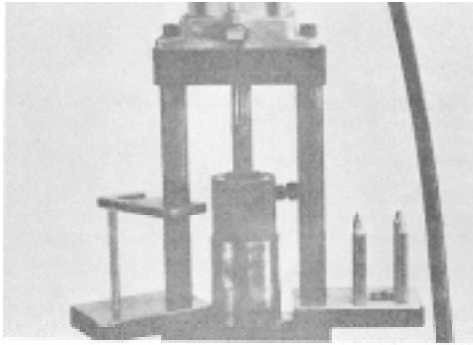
, F6234. Inserting injector into ST-1058 pot
